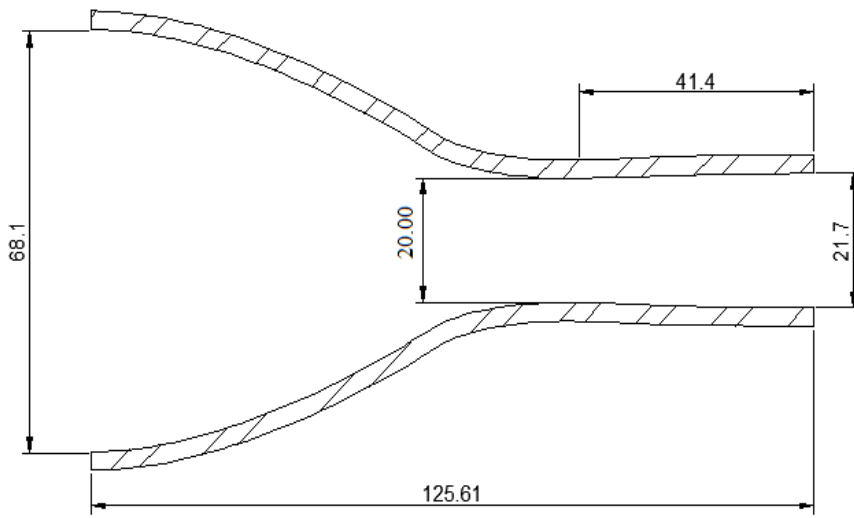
(e) Machine drawing of *PM/5* double parabolic nozzle
